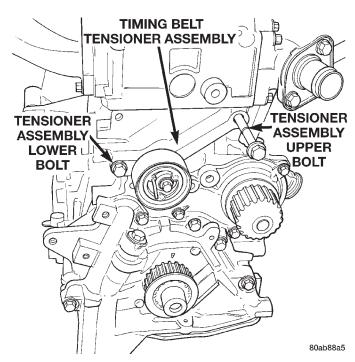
Timing Belt Tensioner Assembly—Removal/ Installation
